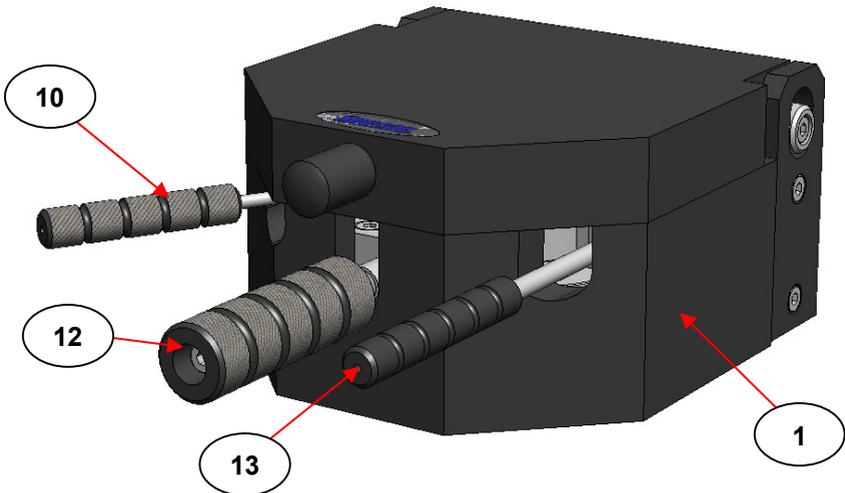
Film Maker Accessory Assembly Components in Cooling Chamber After Heating and Pressing
